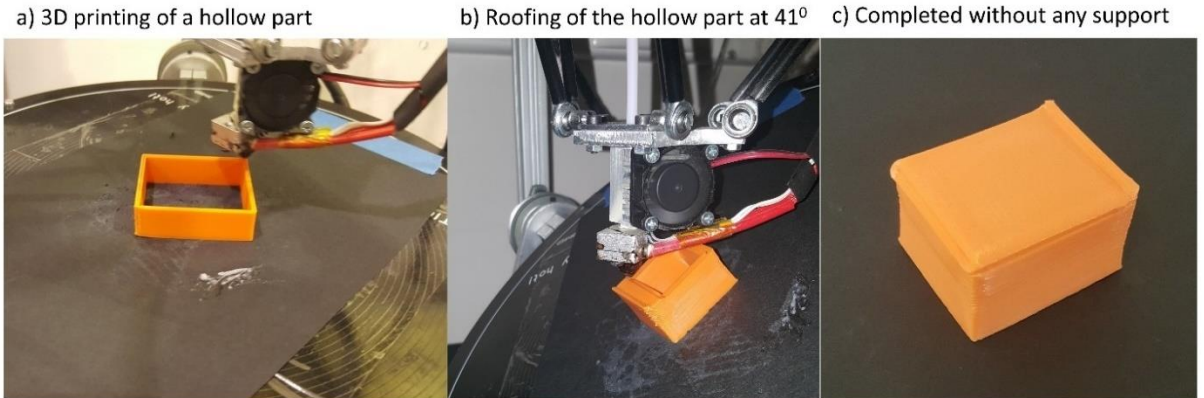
Fabrication of a hollow component to demonstrate the roofing process
